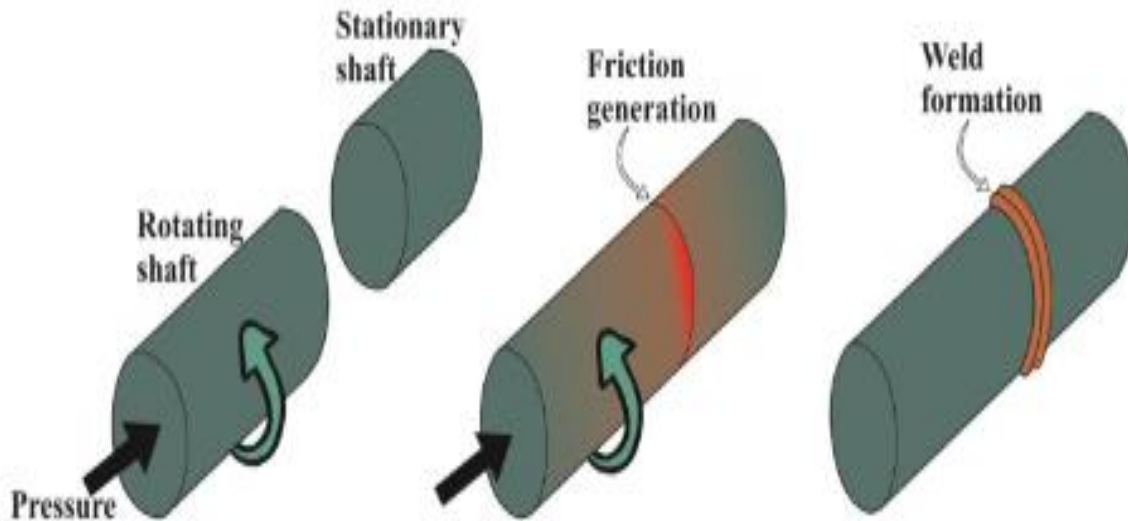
direct drive friction welding (DDFW) [6]
